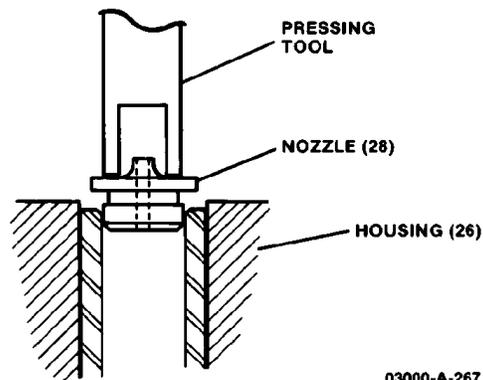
Method of Pressing Nozzle (28) into Housing (26)
